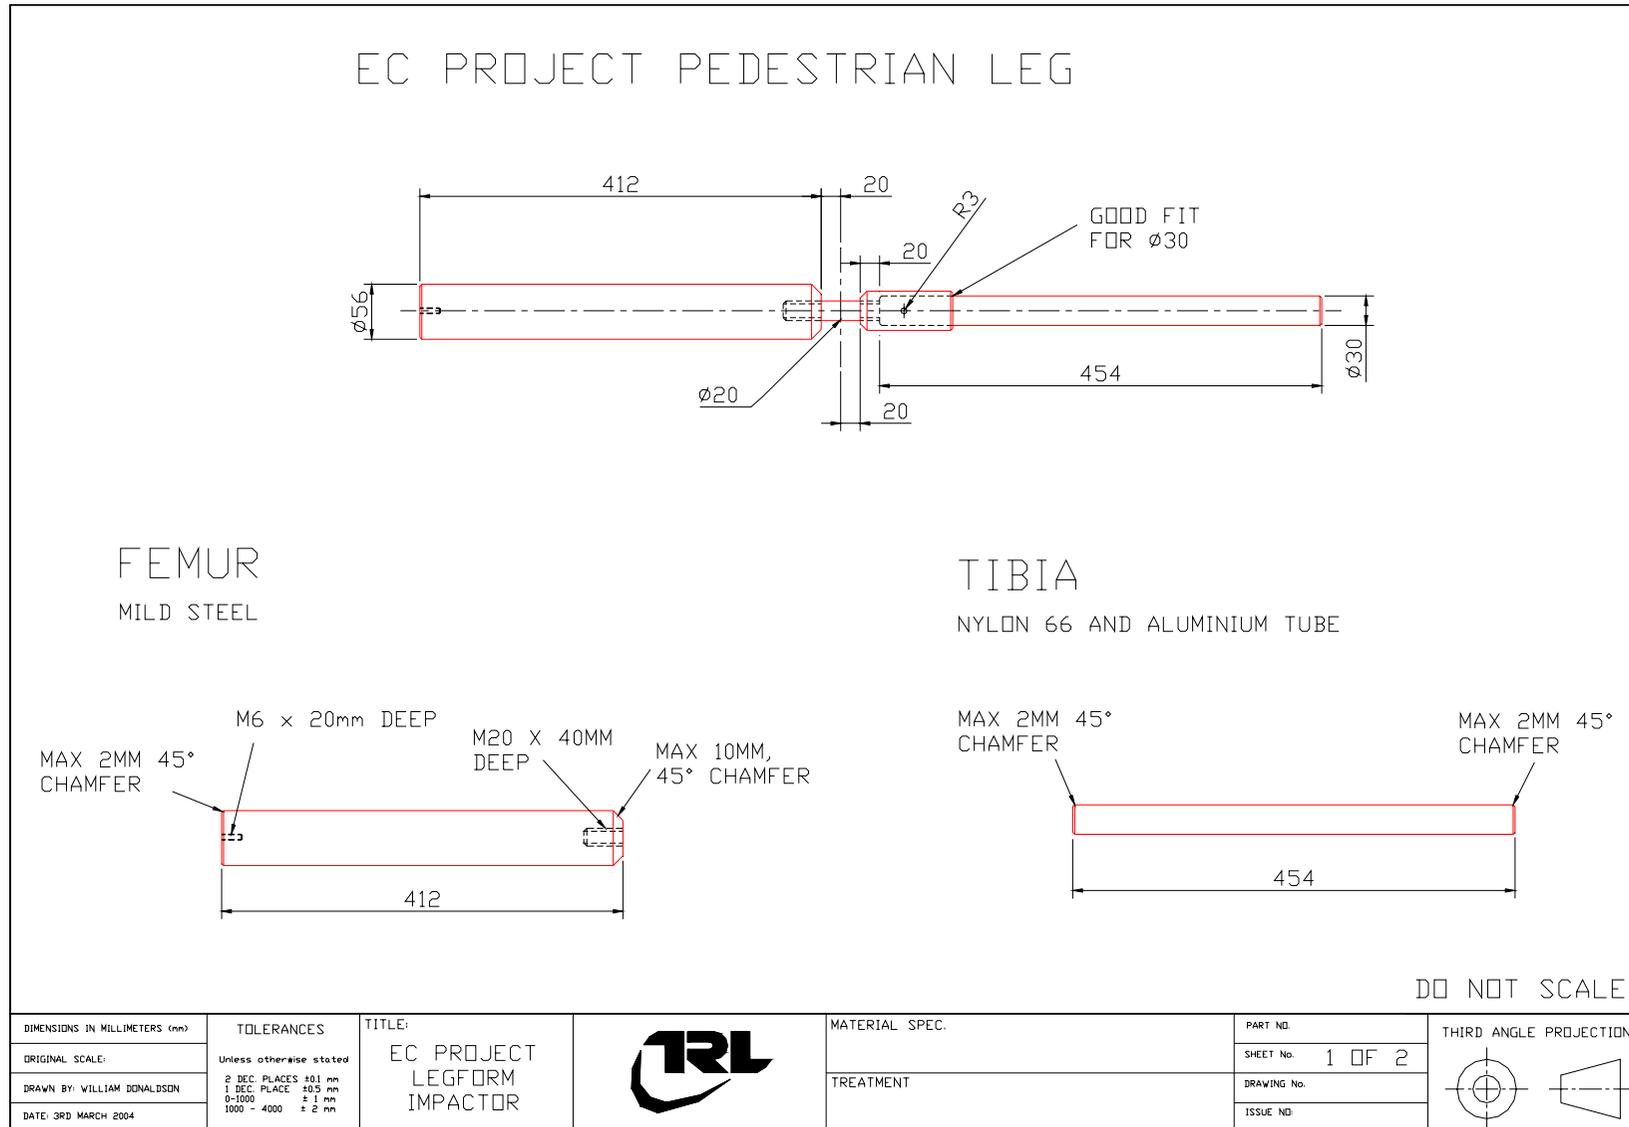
Sensor legform drawings – femur, tibia and assembly drawing of skeletal parts
